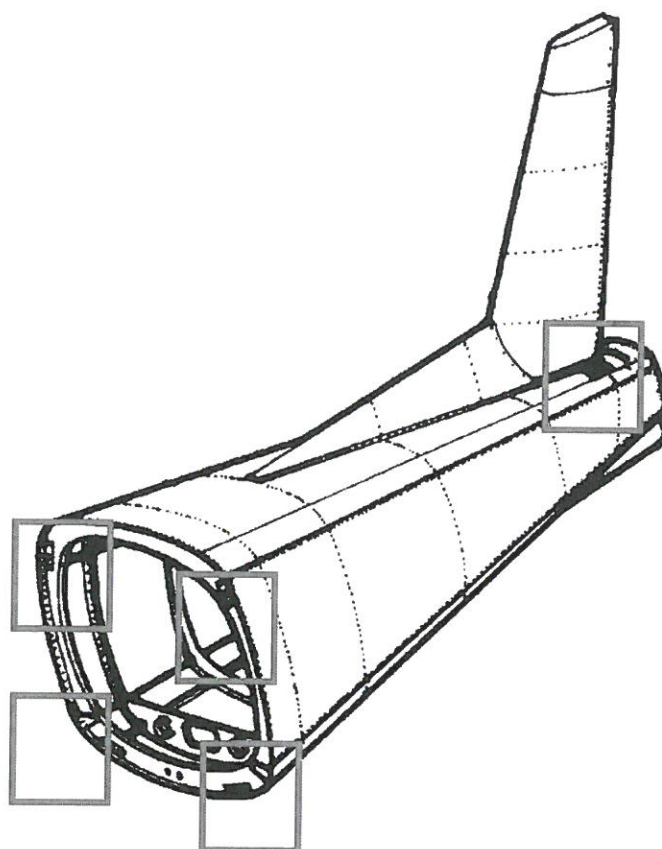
Fuselage rear part of the Z 242L aircraft with market areas for visual inspection check
